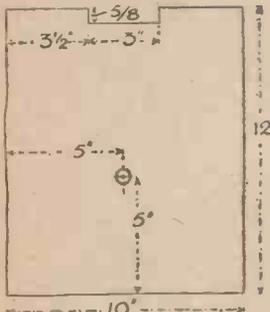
The baseboard, with dimensions for the wheel spindle and back board.
